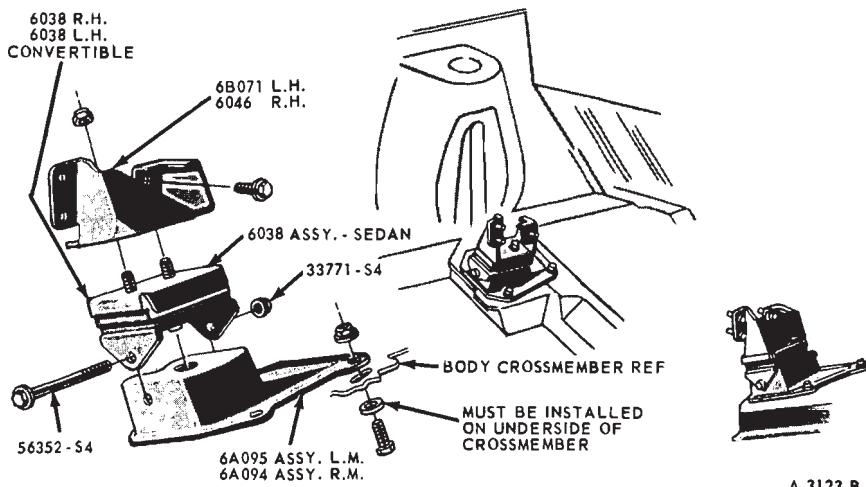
Fairlane and Montego Engine Front Supports—250 CID Engine
